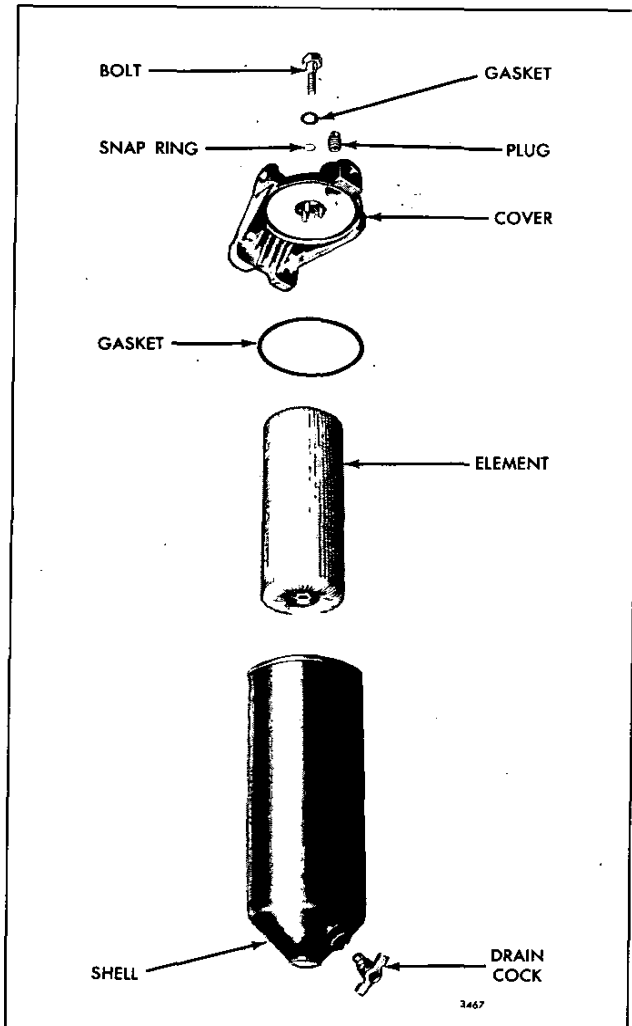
Fuel Strainer Details and Relative Location of Parts
